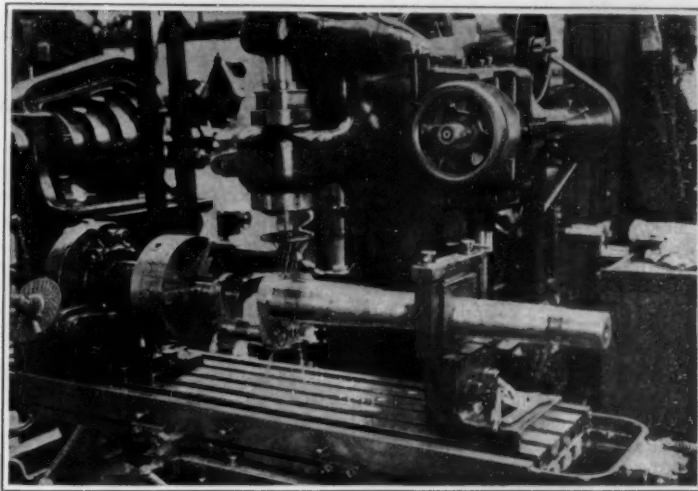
View picturing the finishing of the hollow crankshaft of a Gnome motor.
